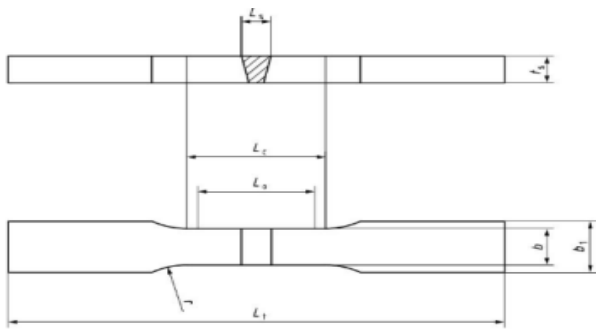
Tensile test specimen for a butt joint in plate [8]
